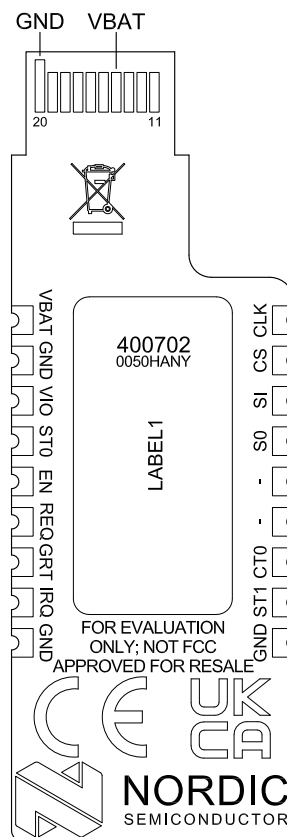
PCB edge connector with VBAT on pin 14 and GND on pin 20, back view
